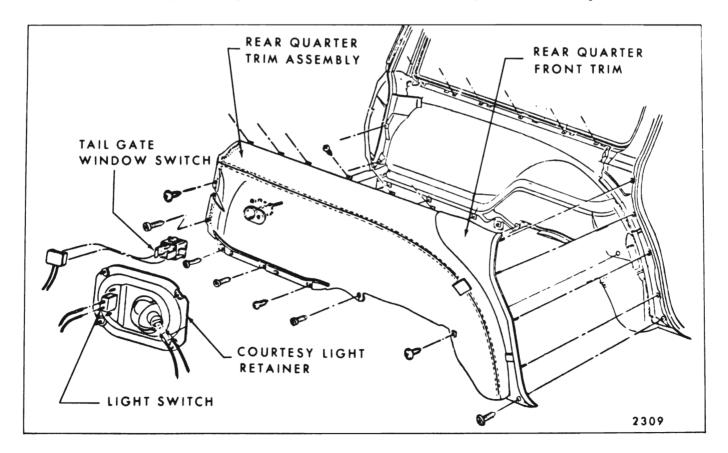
Rear Quarter Trim Panel Left Side - "B" Station Wagons
